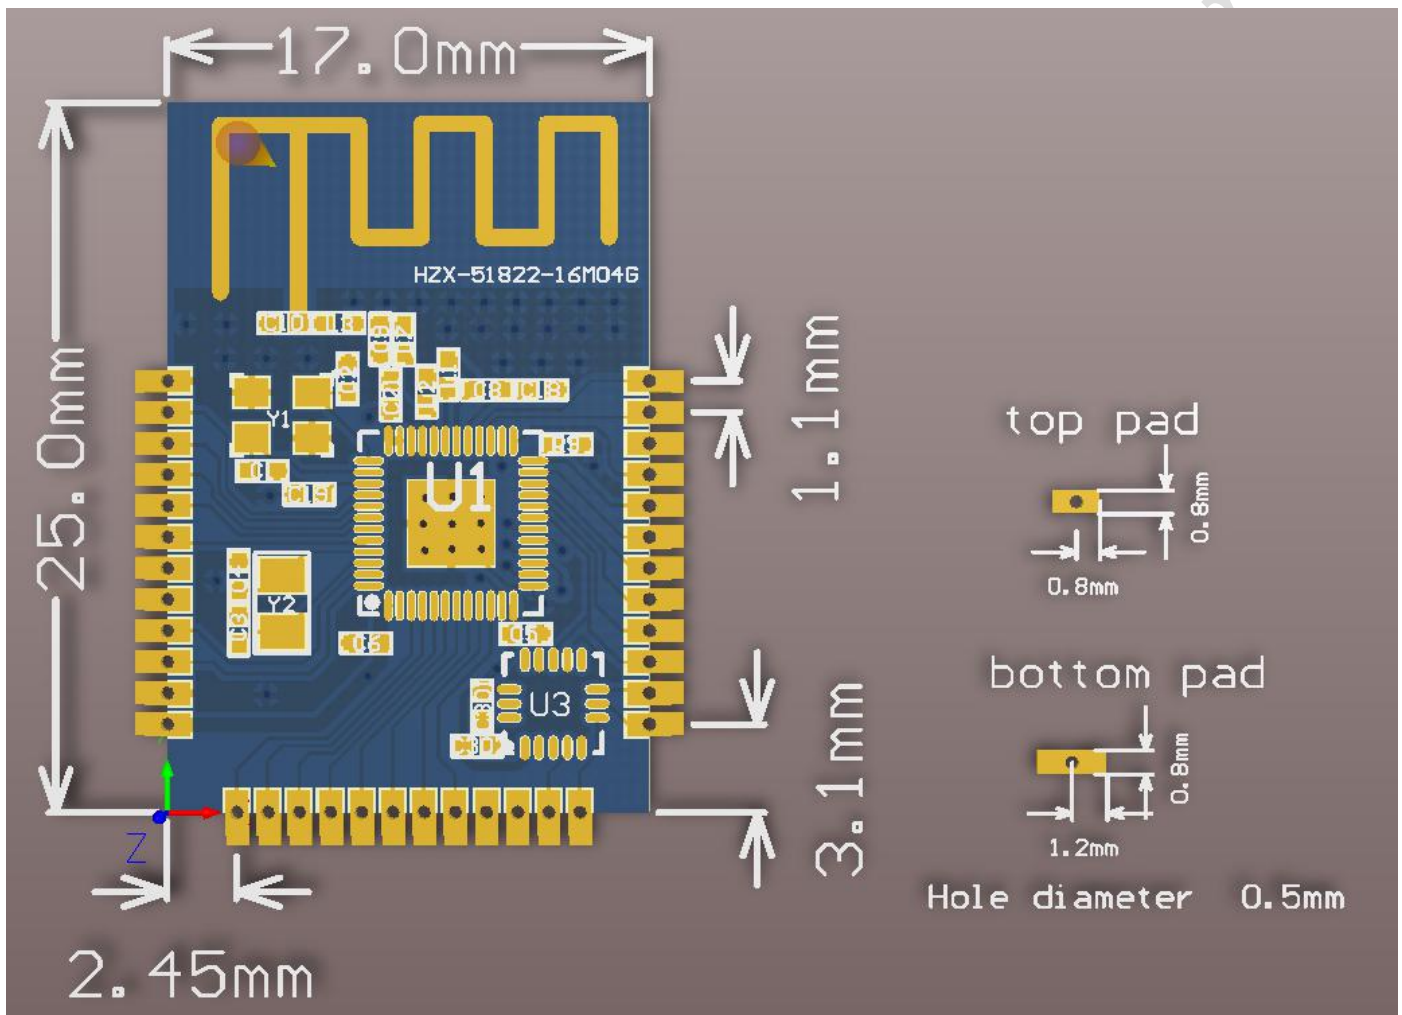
HZX-51822-S04 PCB Footprint and Dimensions
